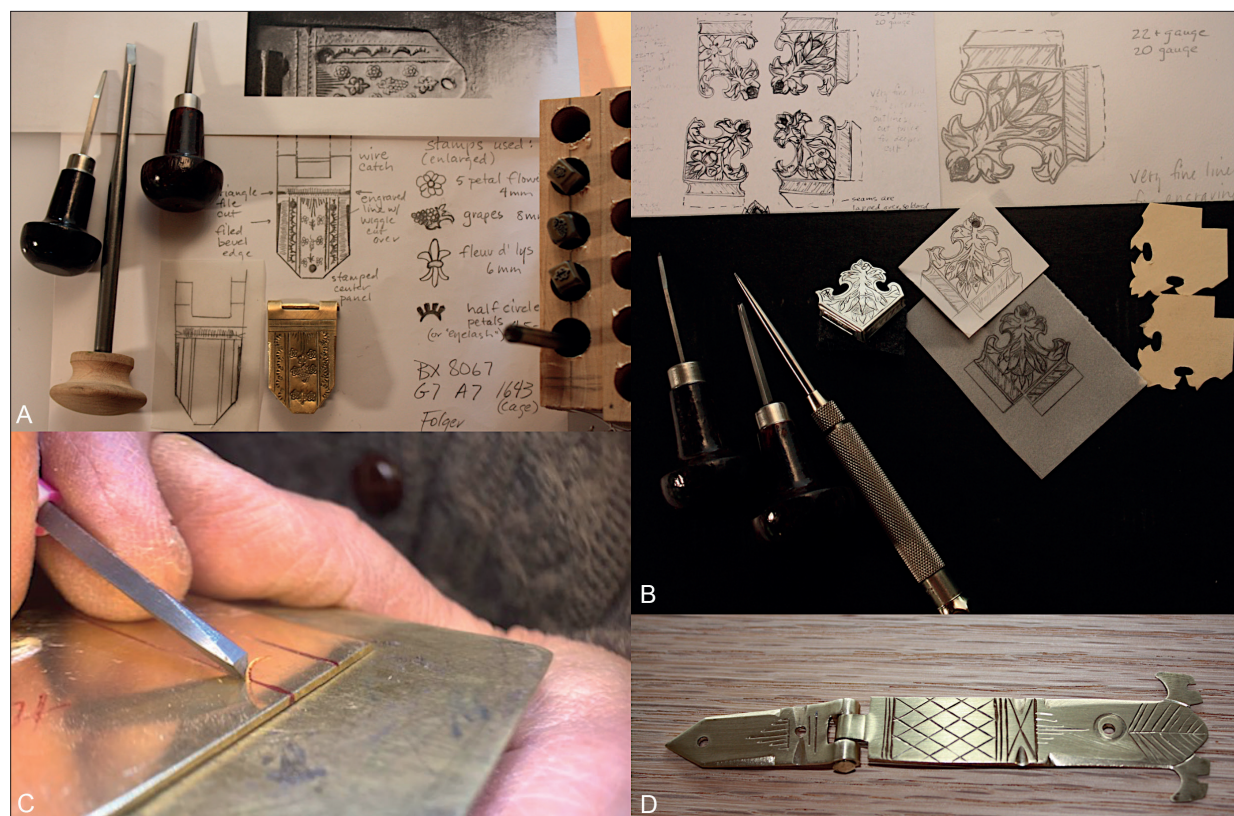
A, B – patterns and tools used to scribe and engrave book furniture, with examples of formed and engraved work; C – close-up of engraving a line; D – common design of traditional book furniture forged at widest part, filed and engraved, hinge section formed and bent, stem riveted at both ends to prevent dislodgement in use (photo by Kent Heimer/Dawn Hoffmann).
